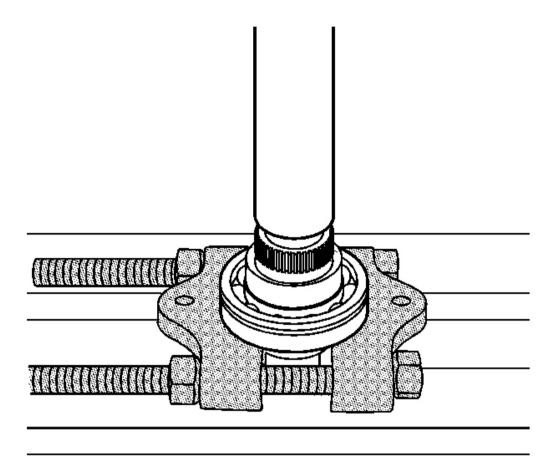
Installing Rear Output Shaft Bearing Using Hydraulic Press & J 22912-01 Courtesy of GENERAL MOTORS CORP.
